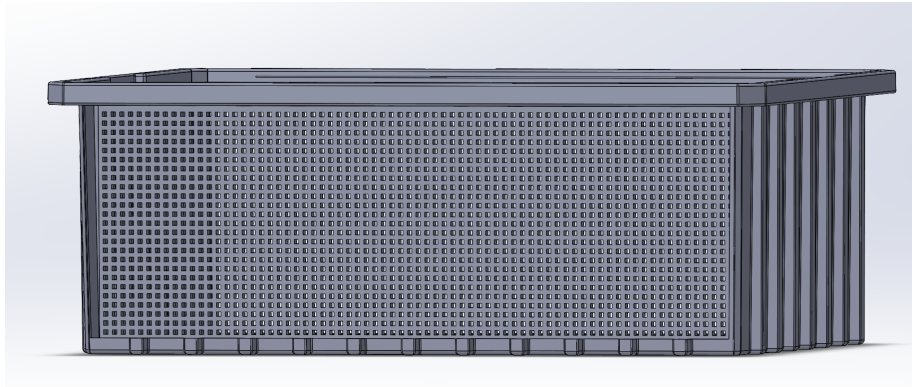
Back Isometric View of SolidWorks Surface Level Subsystem
